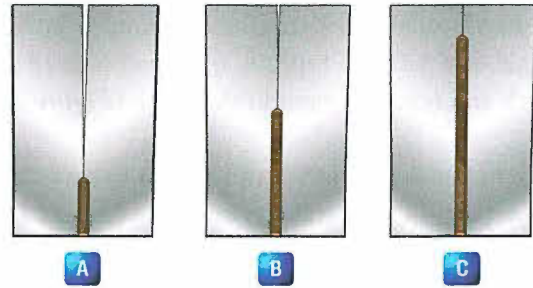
Allowance for a straight butt weld when joining steel sheets.
